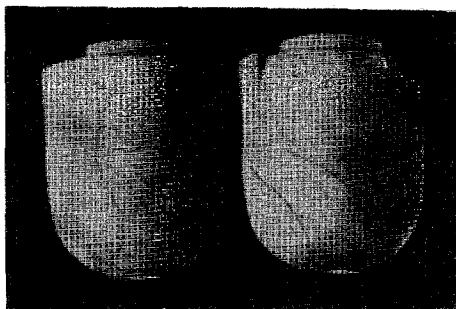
Plugs with bolt fastening made of "Ch1" clay at the Upper Isset' Plant.
